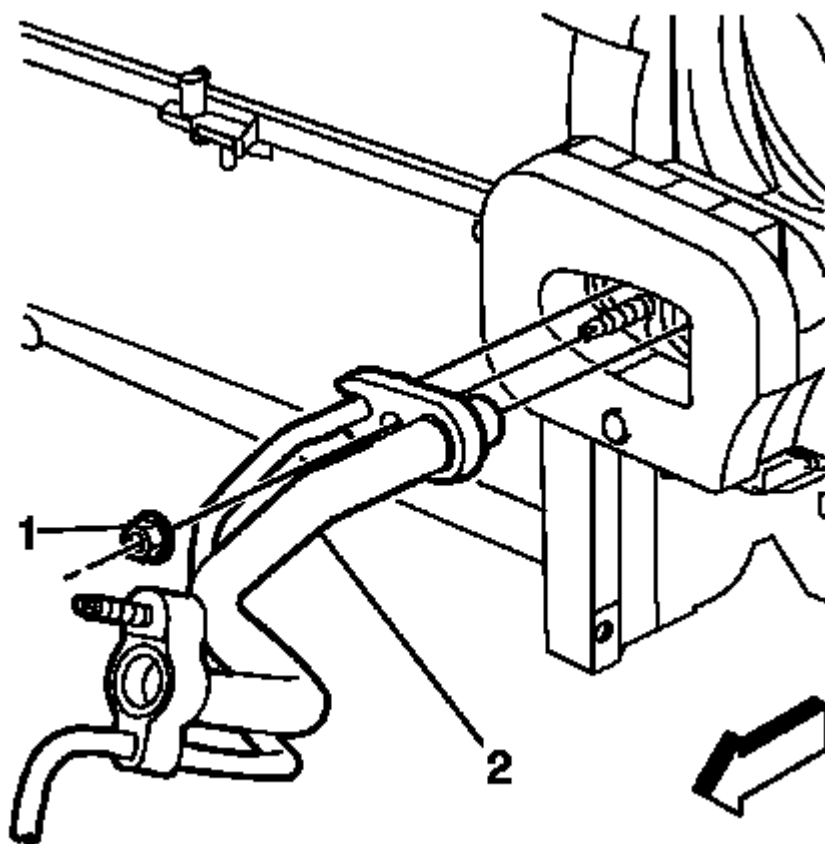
A/C Evaporator Thermal Expansion Valve Tube & Nut At HVAC Module
